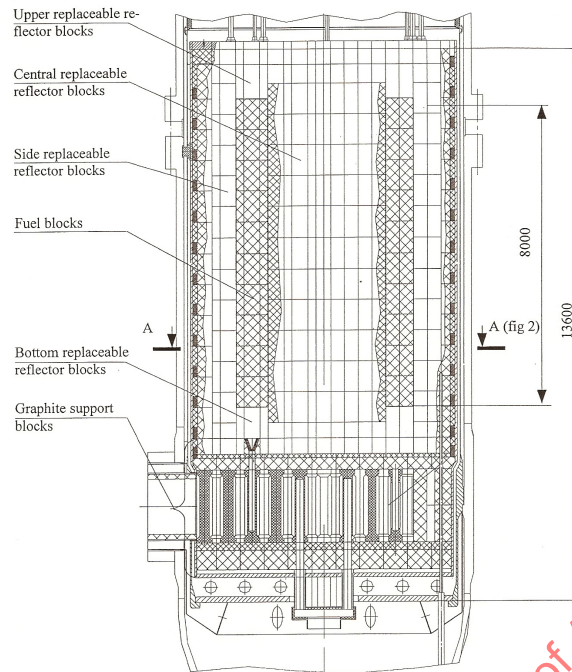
GT-MHR (HTR) Prismatic Core: Elevation View (USA, USSR, Japan, France)
